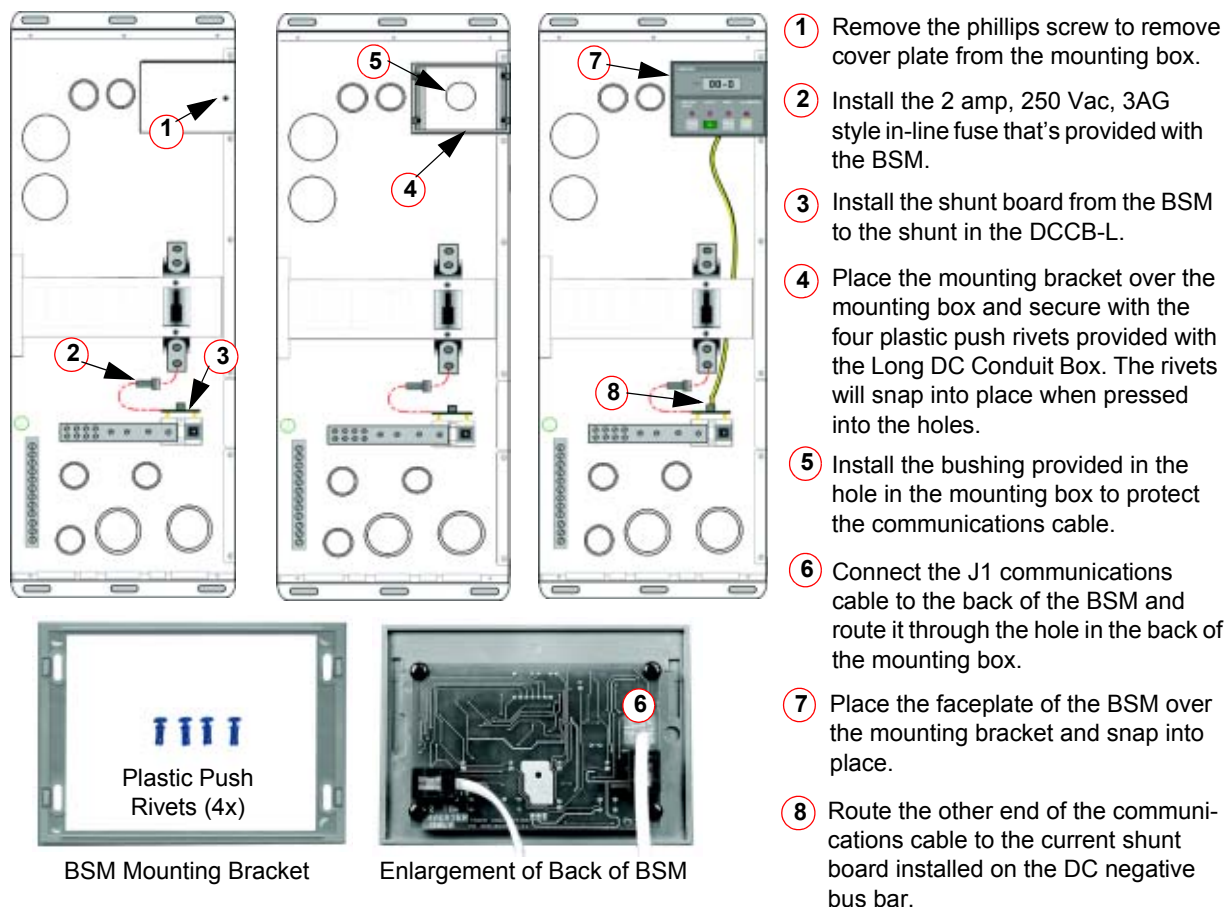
Installing the BSM on the Long DC Conduit Box
